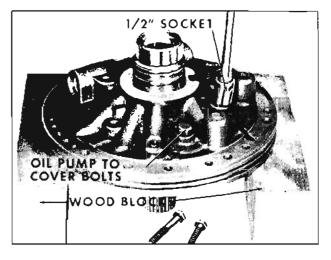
Removing Oil Pump Cover Attaching Bolts
